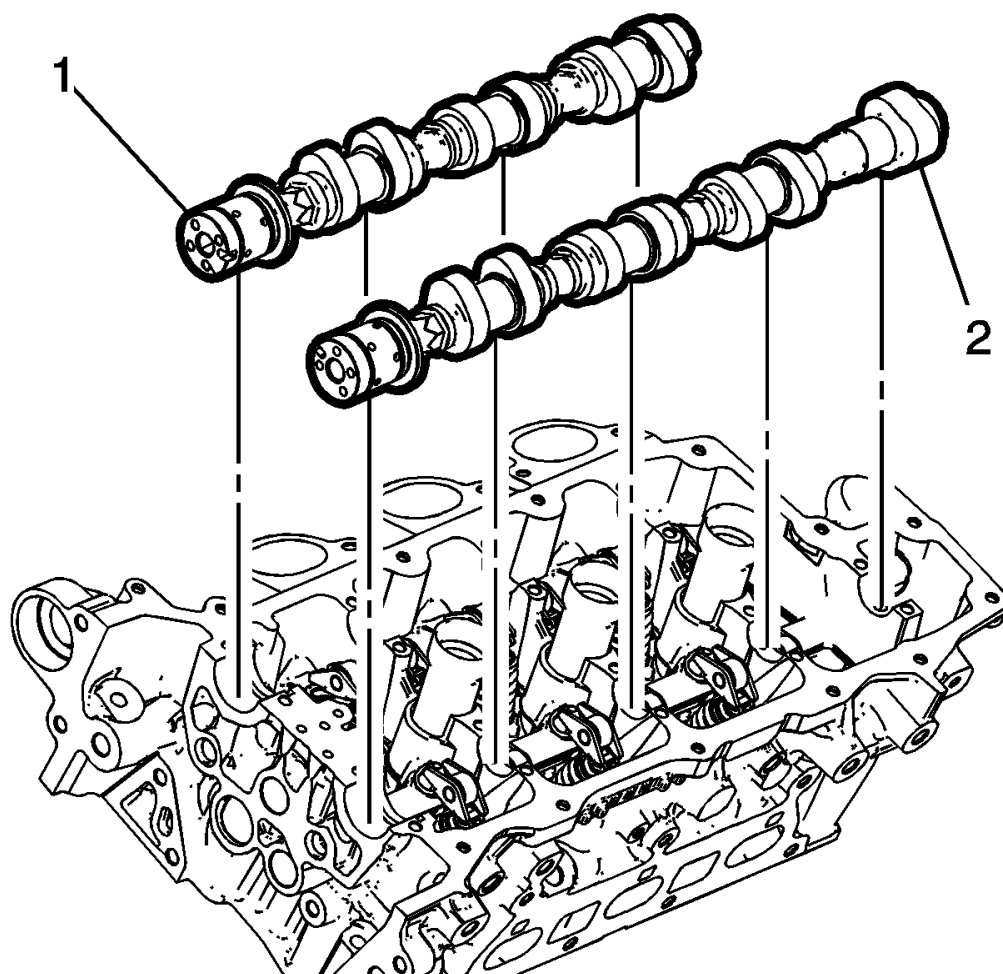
Camshaft Intake & Exhaust Positioning Points
